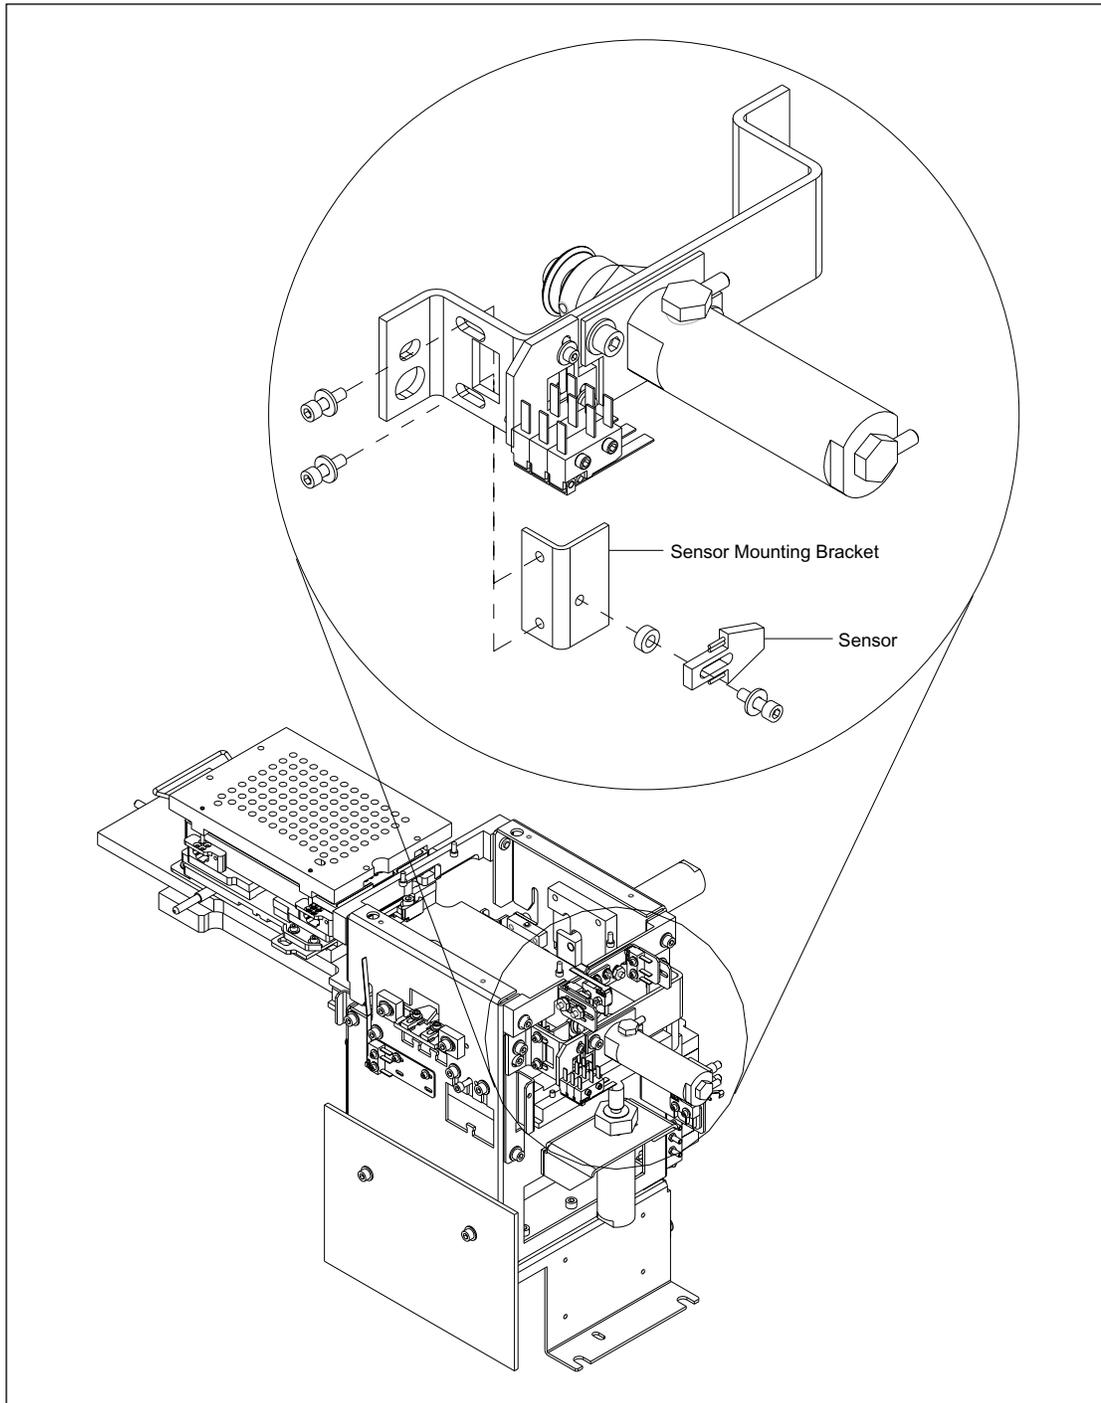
Indexer Y-Position Lock Sensor Mounting (MB 2000).
